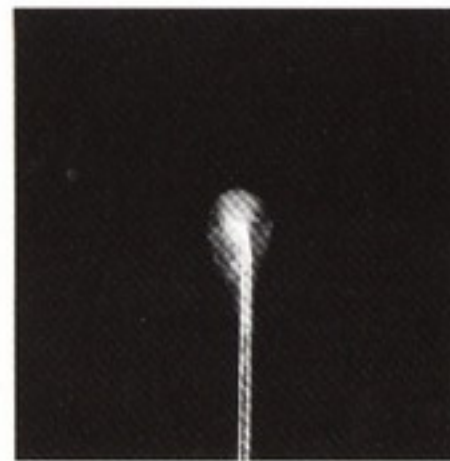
Insert one end of the solder strip in a properly adjusted torch until the end rounds. The rounded end of the solder strip after heating.
